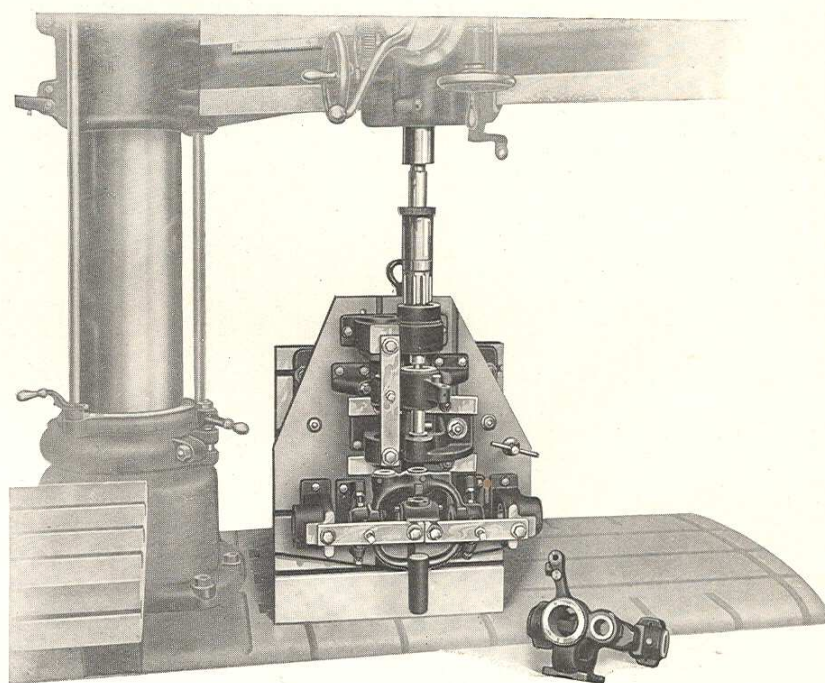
Boring Back Brackets on a Radial Drill.
